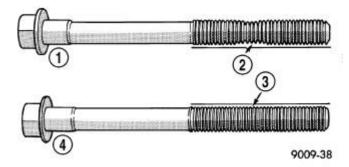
Check For Stretched Bolts And Thread Alignment Courtesy of CHRYSLER LLC
